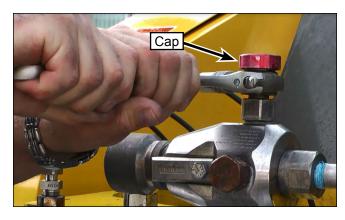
Housing/Cap Removal (15K Manifold Shown).
